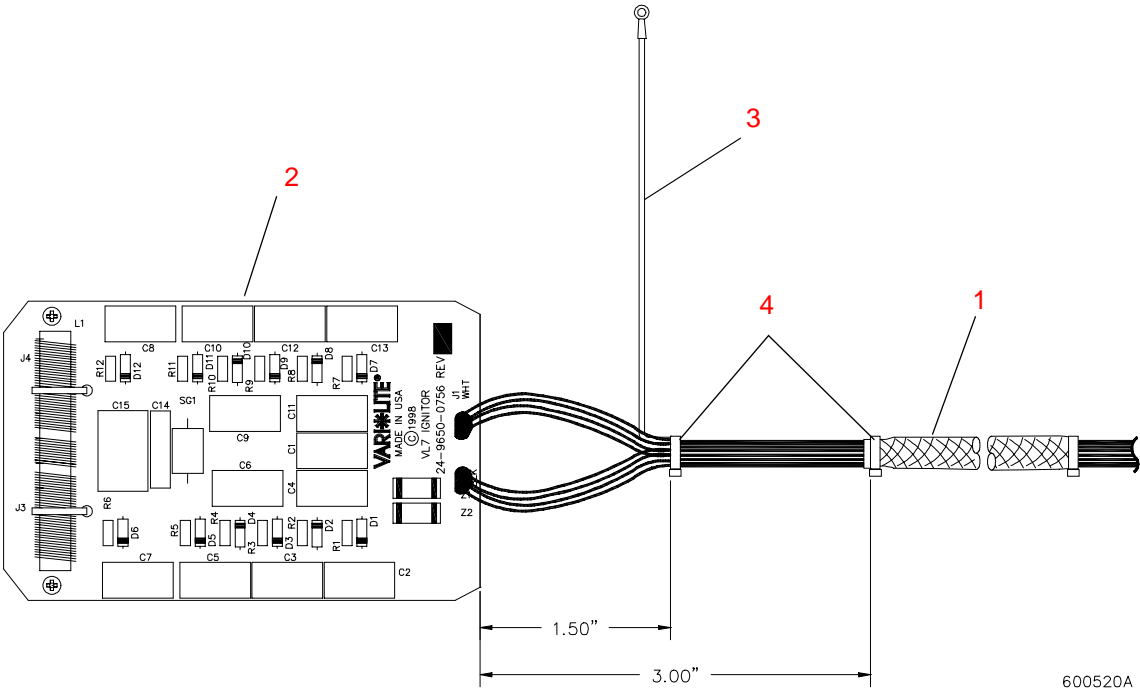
VL6B/VL6C Ignitor Board/Cable Assembly
